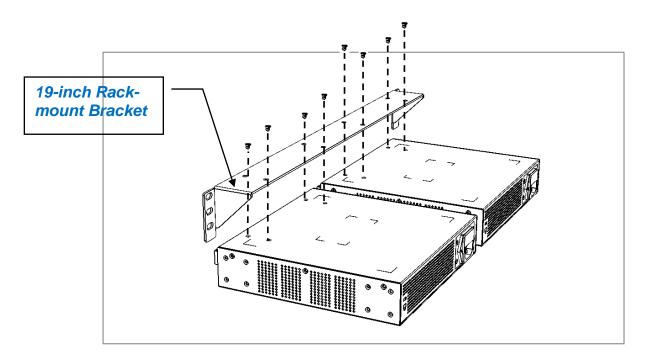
Install the19-inch rack-mount bracket for two-switch mounting
